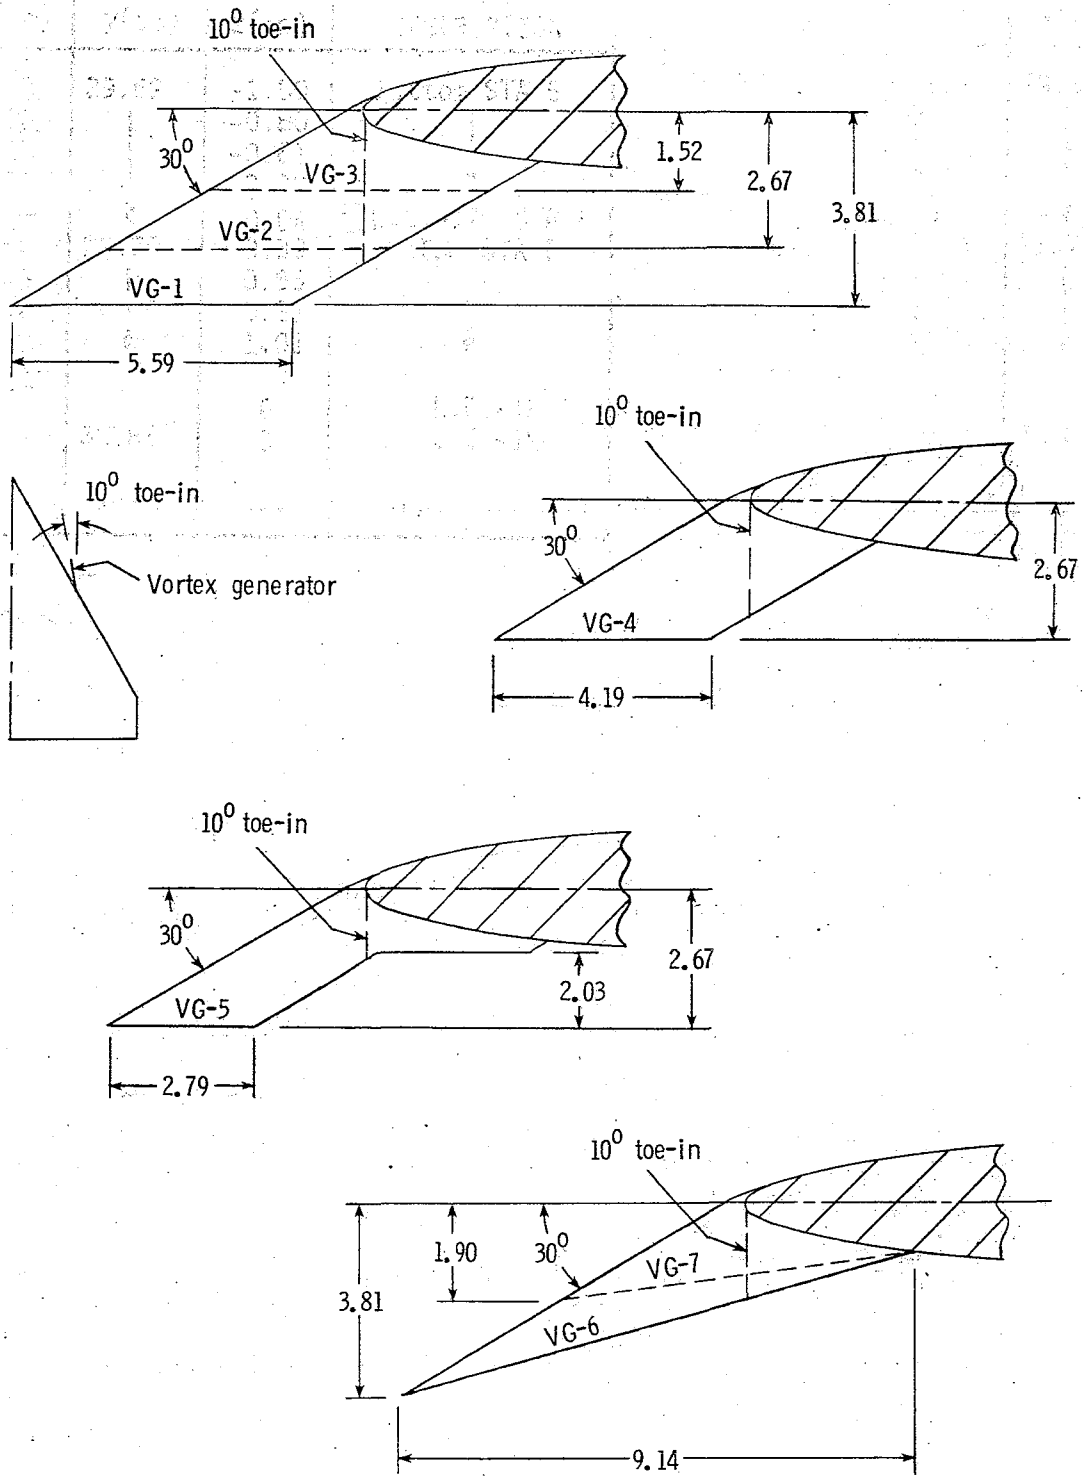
Drawing of pylon vortex generators tested. Dimensions in centimeters.
